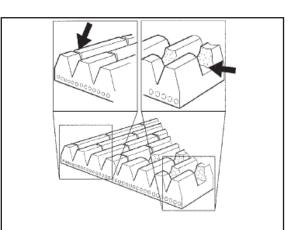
At large and deep cracks or if small pieces are missing, the belt should be replaced.
